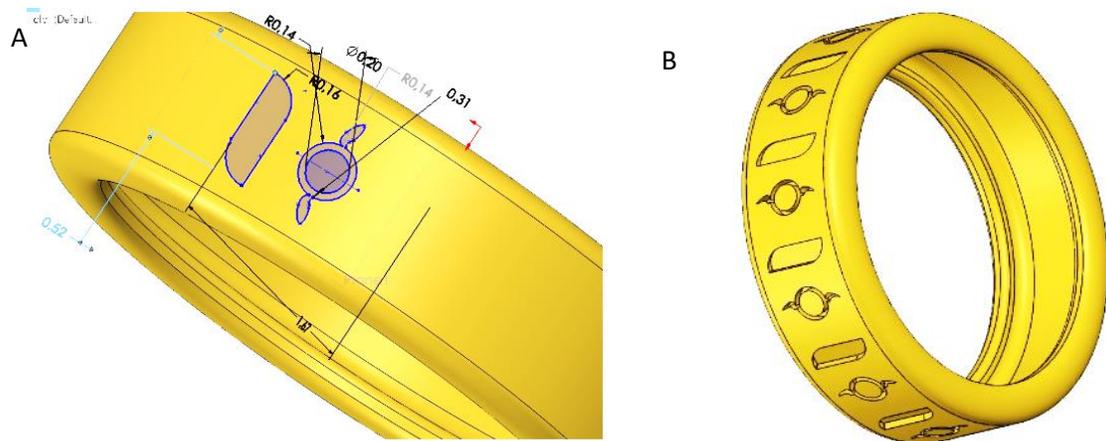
Ring CAD (A: design on the surface of the ring), (B: Final design).
